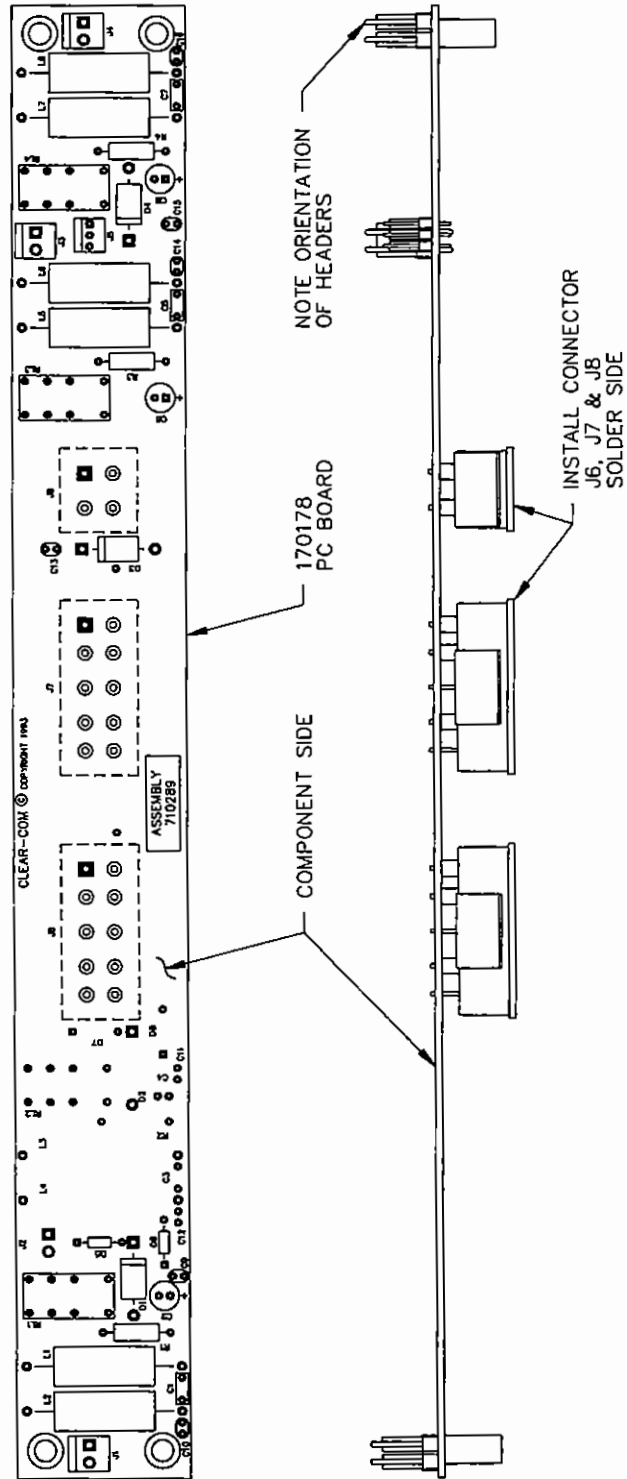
Assembly Drawing - PSU-102 Rear PCB, Rev. A
